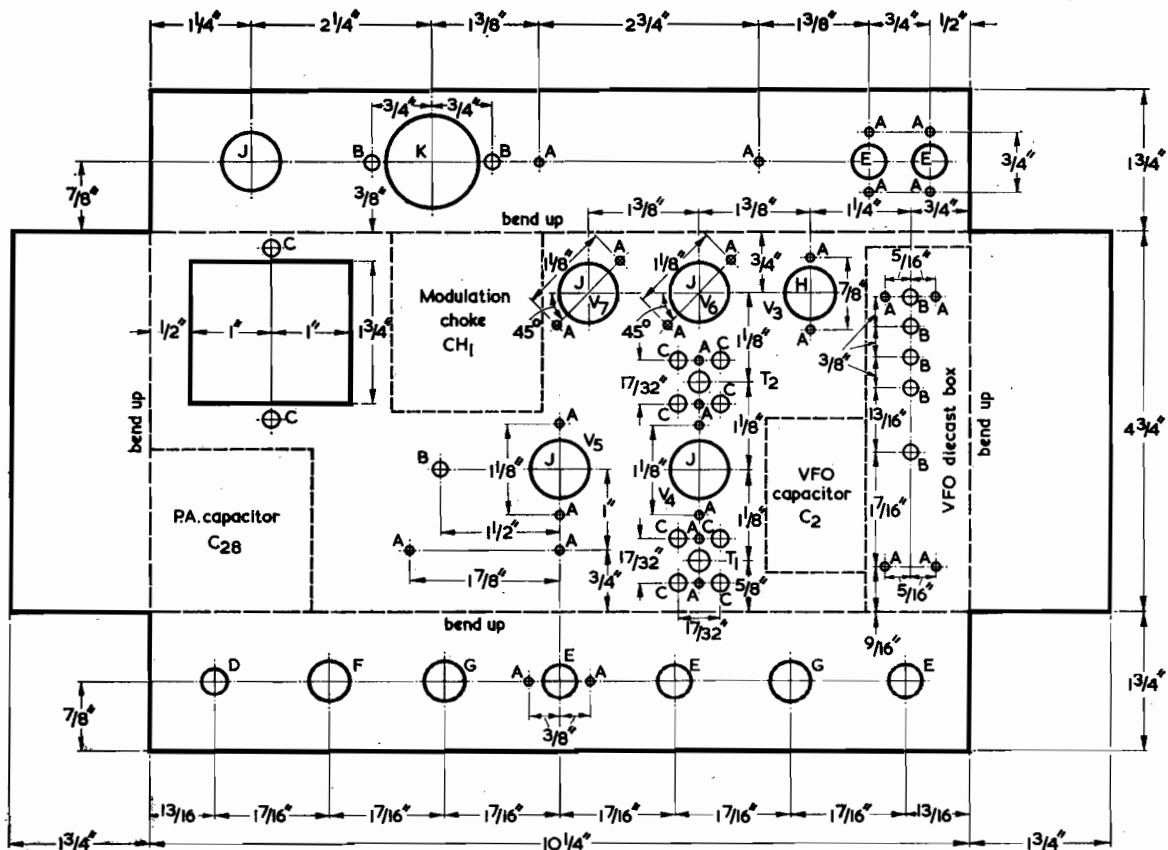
Chassis drilling details. The material is 16 s.w.g. aluminium, and the sides are bent up along the broken lines. The drilling details for CH1 and C28 have been omitted as they will vary for different versions of these components
